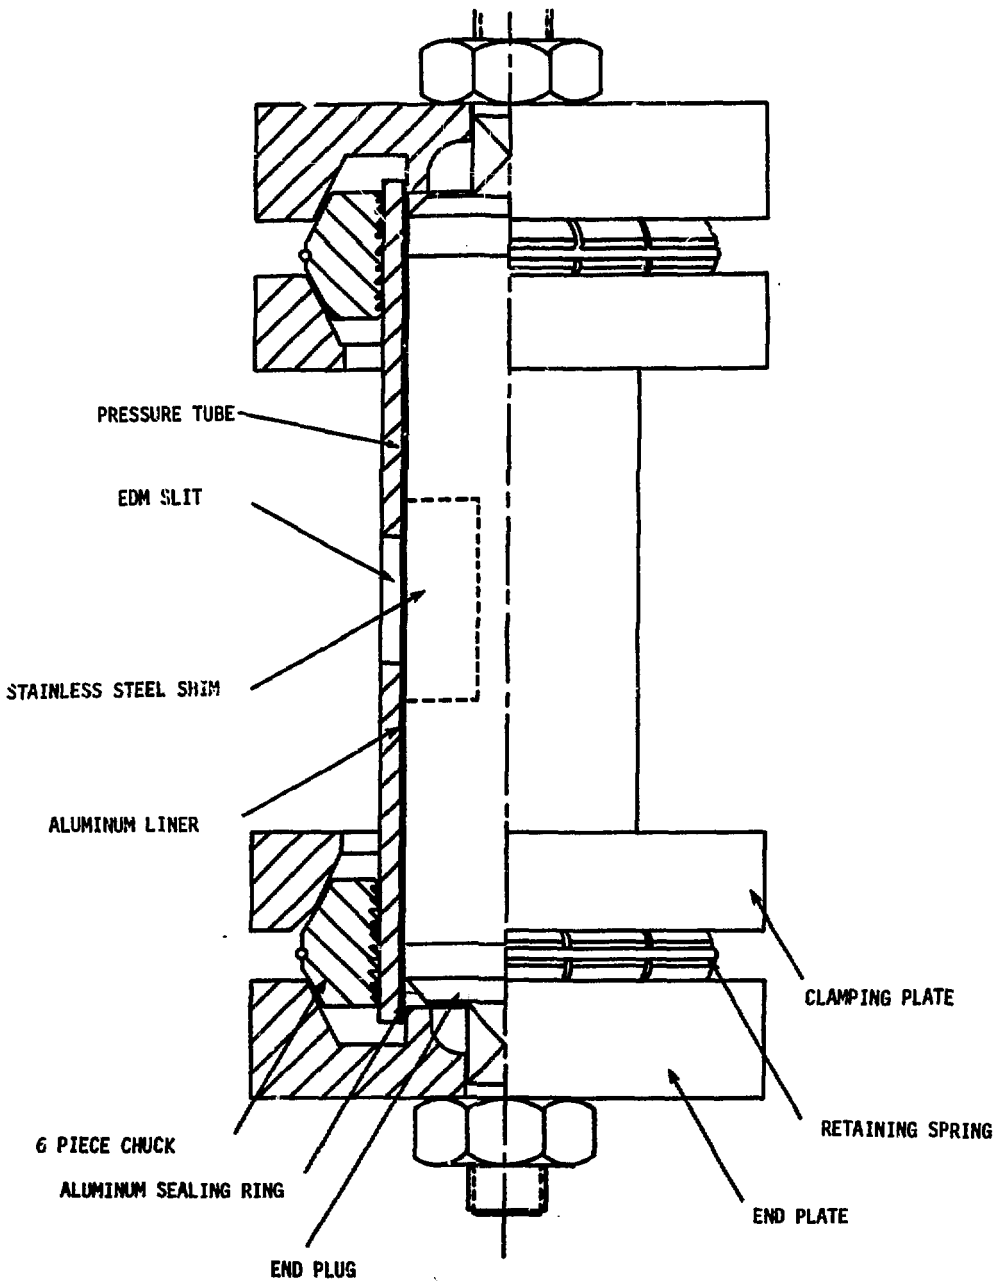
BURST TEST ASSEMBLY. CLAMPING AND END PLATES ARE BOLTED TOGETHER
